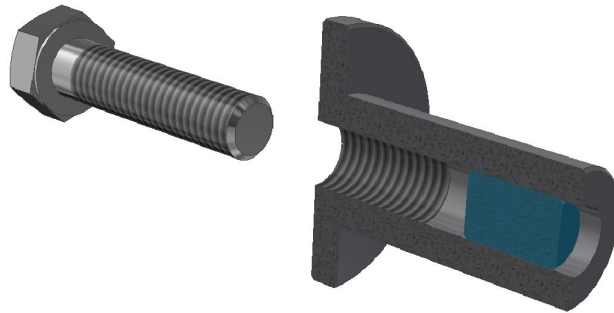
Exploded view of the adjustable section of the inlet manifold.
